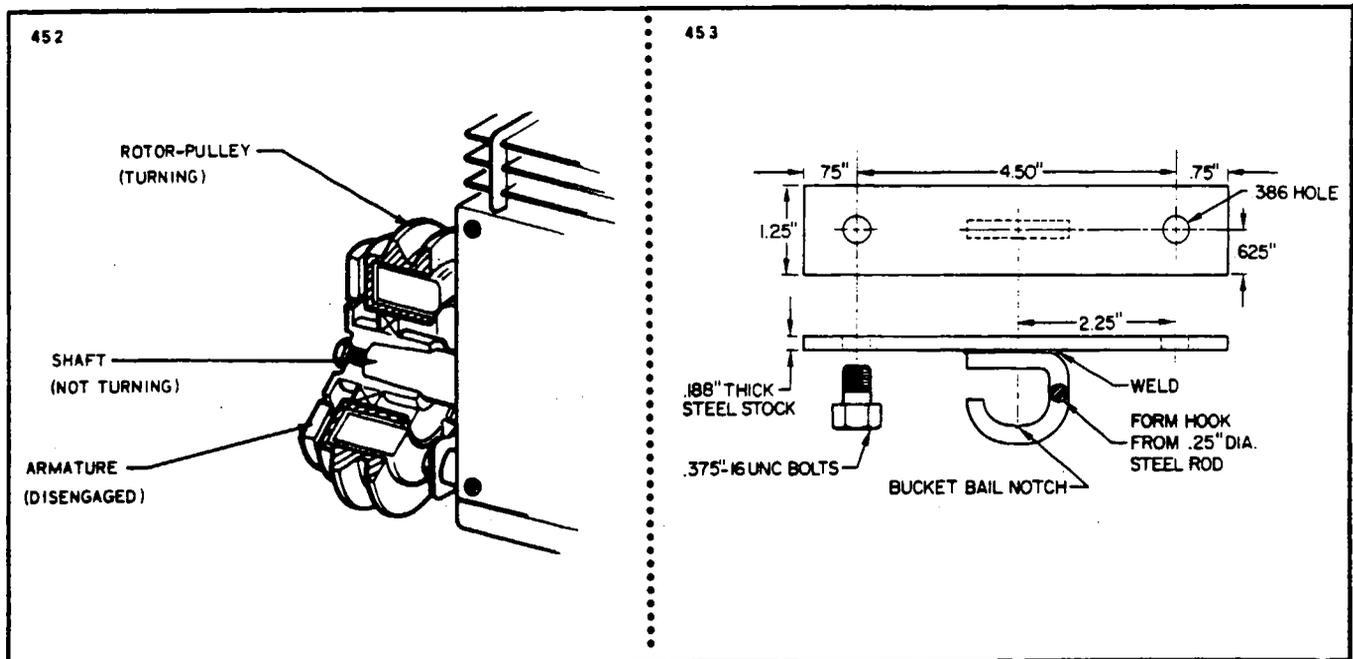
Magnetic Clutch and Fabricated Drive Belt Tension Adjustment Bracket
